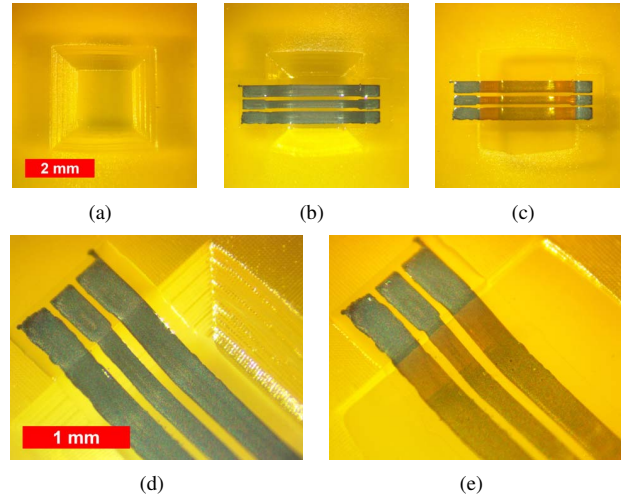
3D-printed test vehicle for inkjet-printed TMV and partial encapsulant capping verification: (a) 3D-printed partial encapsulant, (b) inkjet-printed TMVs and (d) perspective detail, (c) capped TMV-integrated encapsulant and (e) perspective detail.
